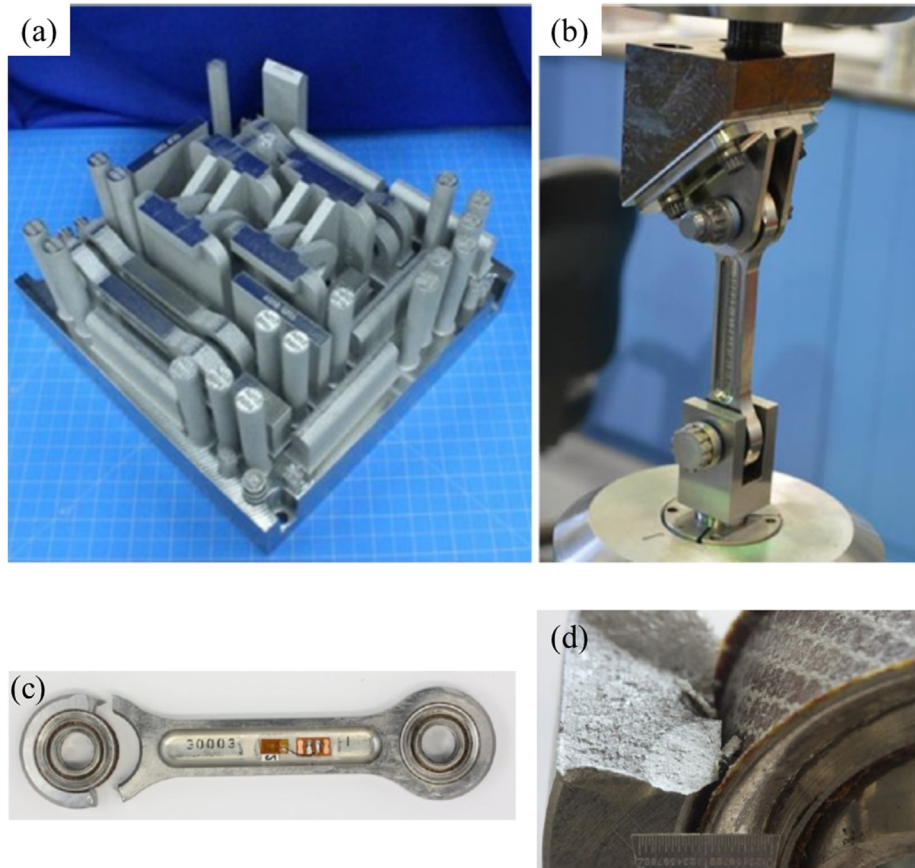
(a) The layout of the build plate for the uniaxial specimens and V-22 links. (b) Axial fatigue test configuration of the link. (c) Representative of the fractured link assembly and, (d) crack initiation [102].
